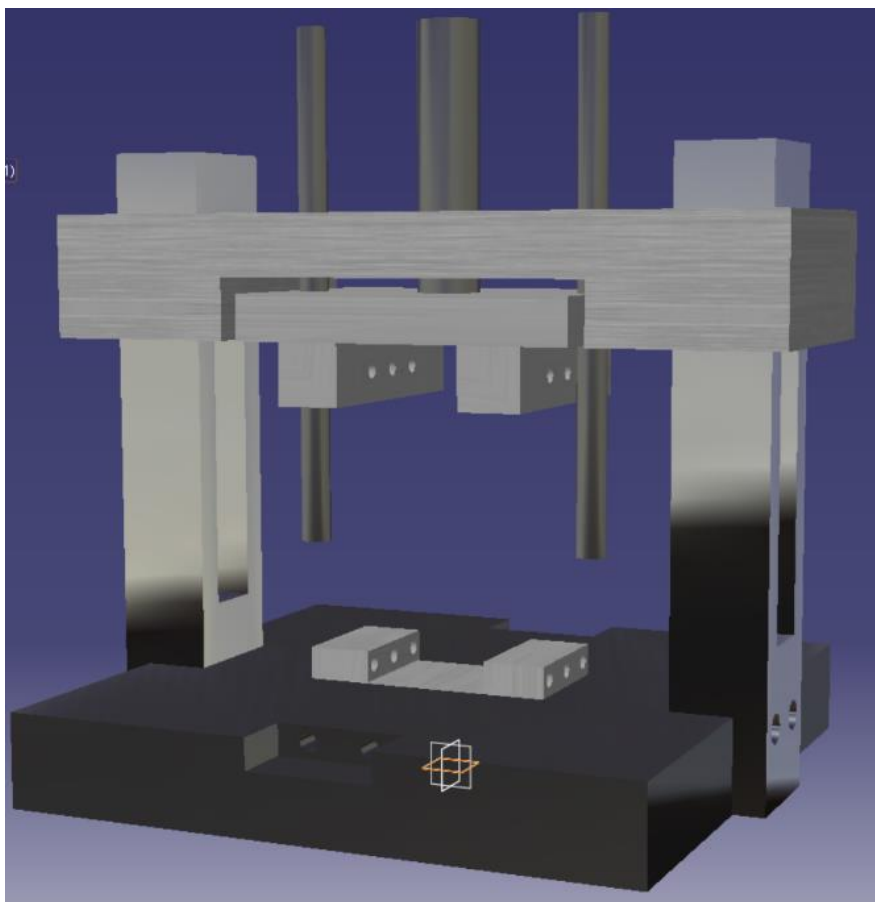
Design of the pre-crack rig CAD model Type B version 2
